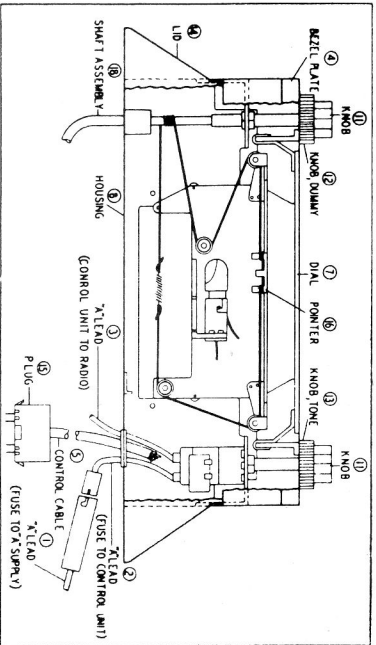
Control Unit C627A (Ford), Showing Location of Parts and Dial-Cord Installation Details
